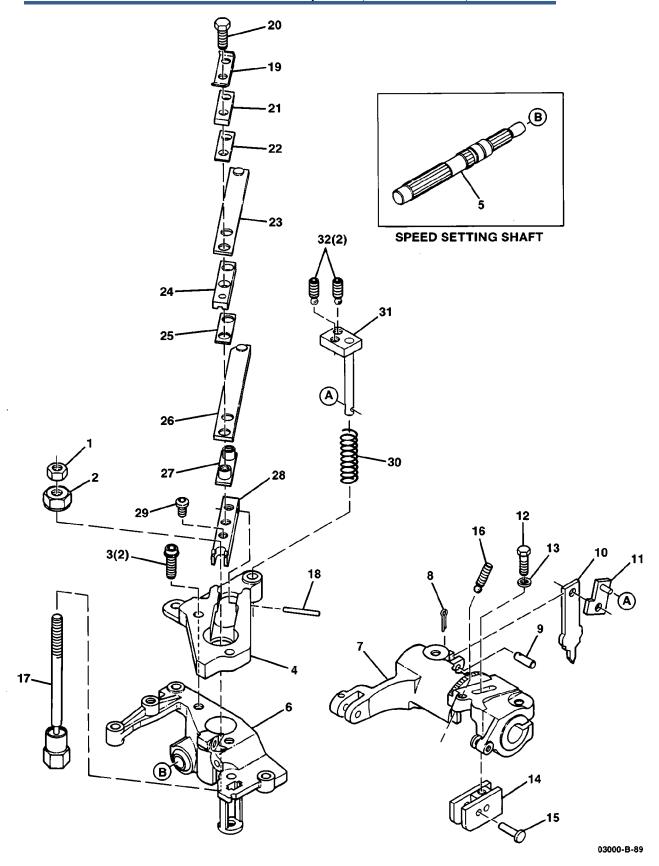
Exploded View of 3161 Torque Rise Feature
